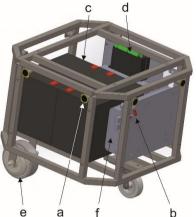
Internal components of a mobile platform: a – ultrasonic sensor, b – circuit breaker, c – battery, d – motor driver, e – BLDC hub wheel, f – power converter
